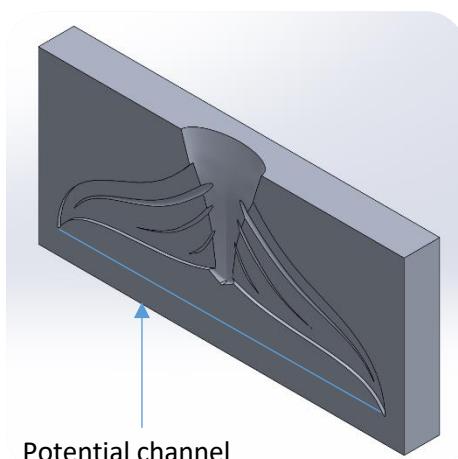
CAD model of one half of the proposed mould (locating dowels to be added by technician at their request)
